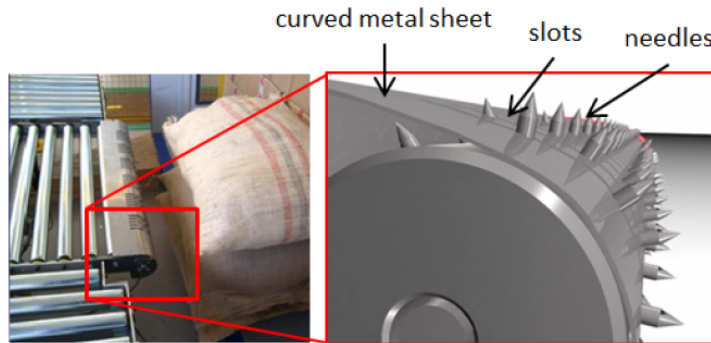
The frontal side of the Needle Roller gripper and a detailed view.
